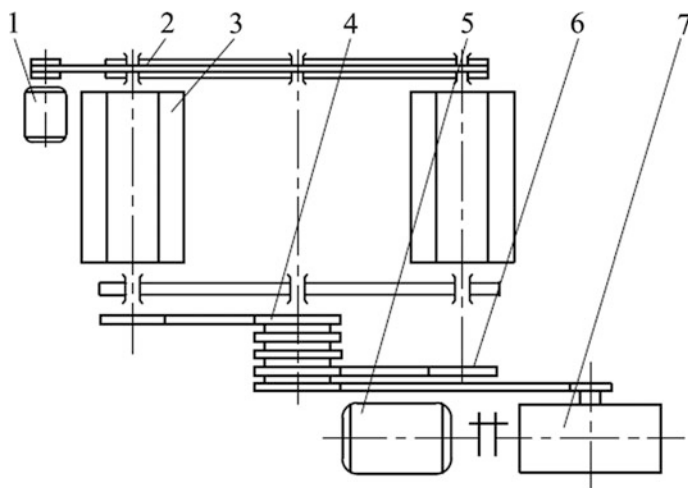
Double driving structure diagram. 1—Revolution control motor; 2—tie-rod belt wheel; 3—barrel; 4—primary belt wheel of rotation; 5—rotation control motor; 6—barrel belt wheel; 7—speed reducing mechanism
